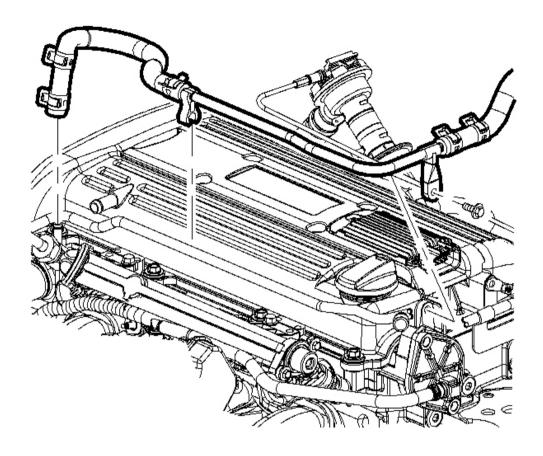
View Of Surge Tank Hose Courtesy of GENERAL MOTORS CORP.
